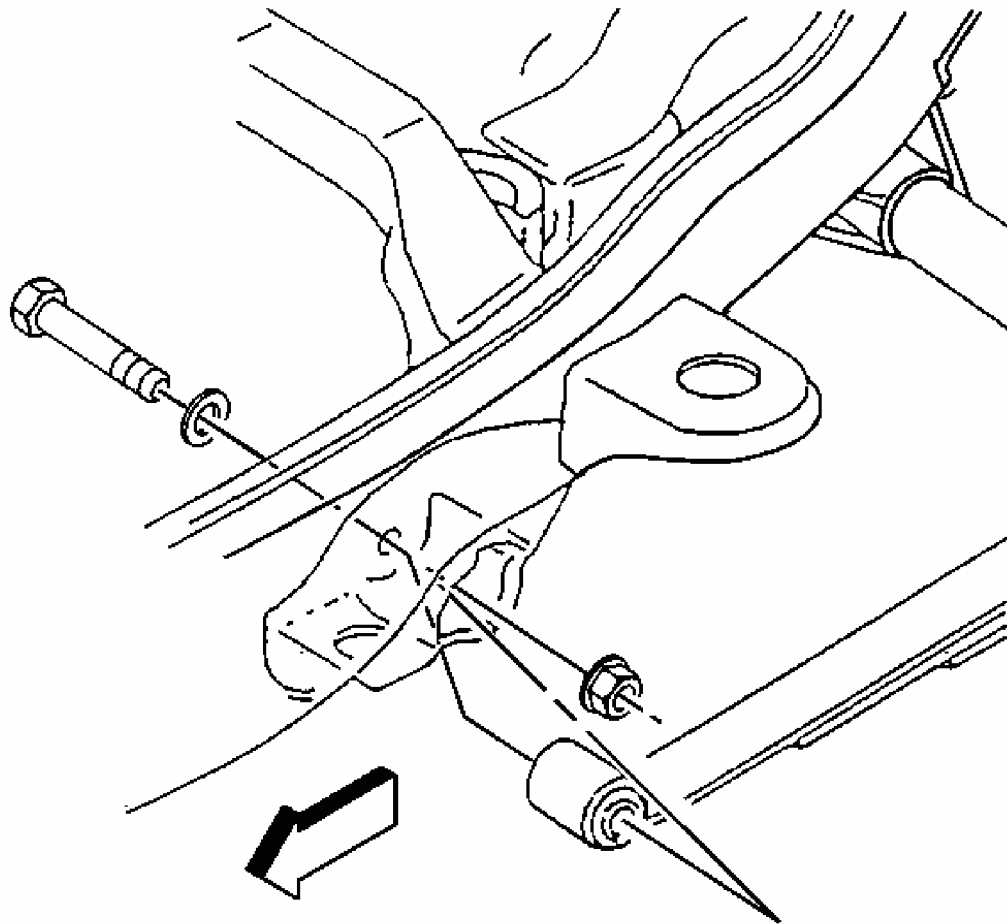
View Of Leaf Spring To Front Bracket Mounting Nut & Bolt
